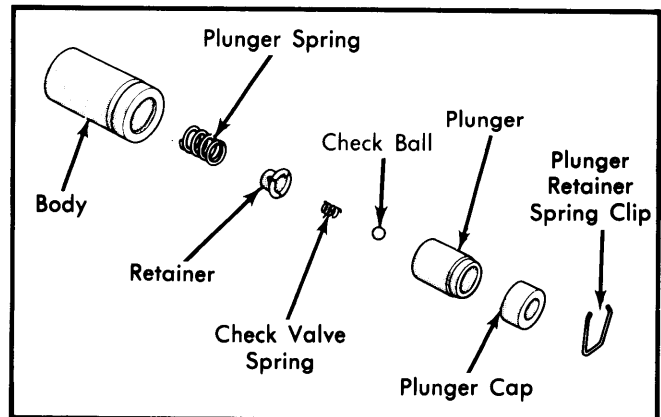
Exploded View of Hydraulic Lifter Assembly
